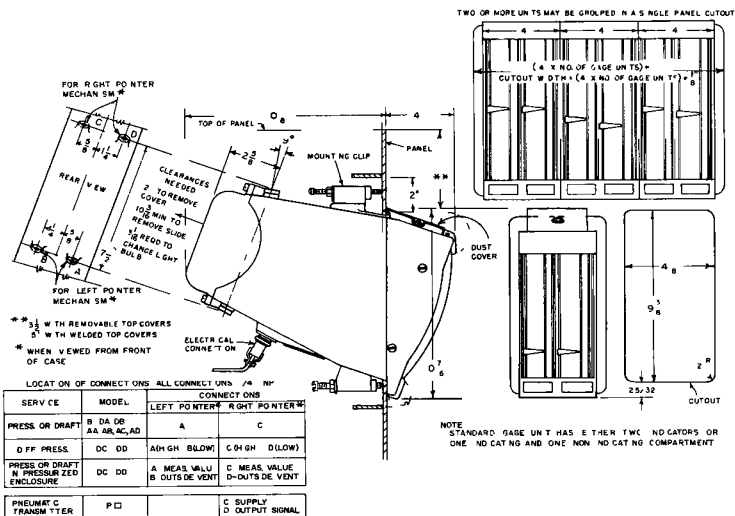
Mounting Dimensions for Semi Flush Mounted Type PG Gage
